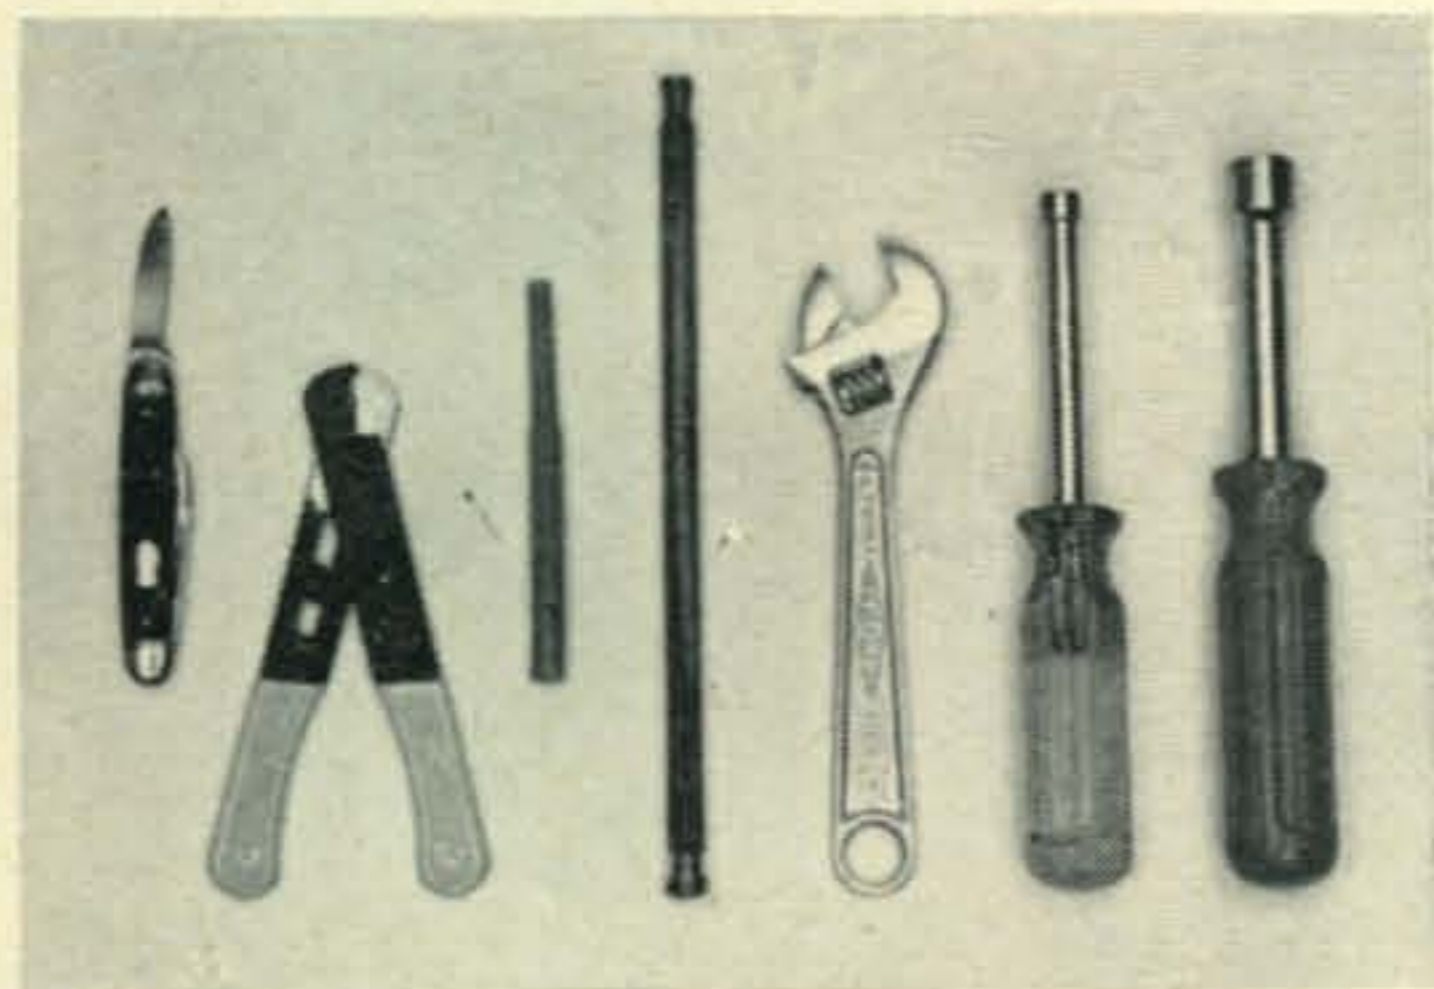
Pictured left to right: penknife, a simple adjustable wire stripper, plastic type nut starter, nut starter with coil spring at each end to grip 1/4" and 5/16" nuts, 6" adjustable wrench and two different size nut drivers.
